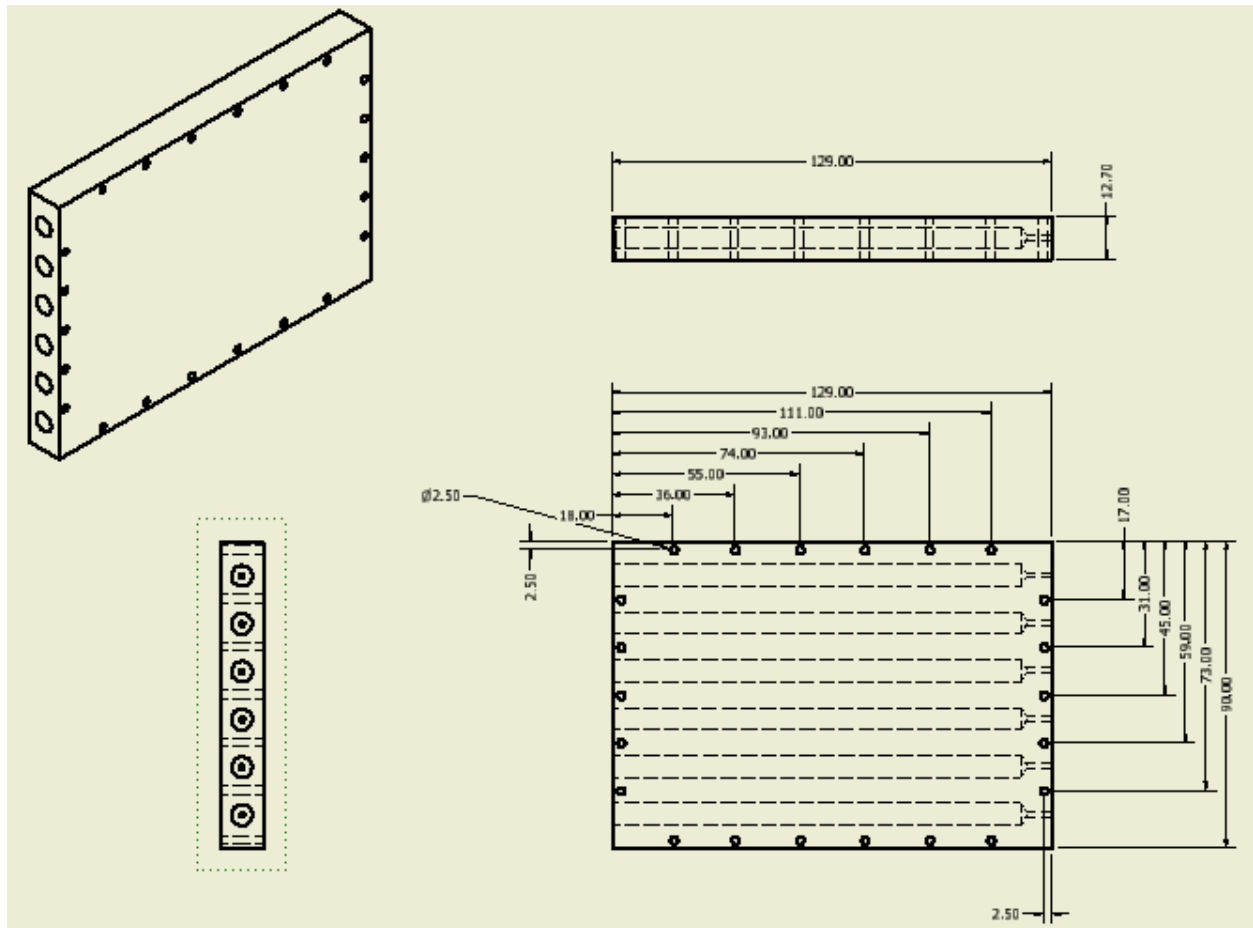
CAD drawing of the heating plate for the second version LiMIT trenches
